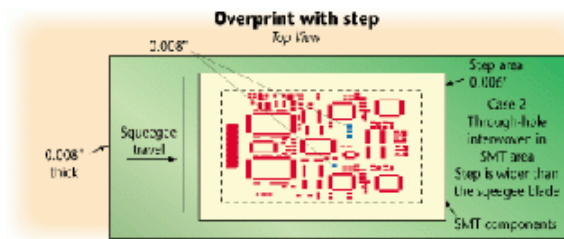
If through-hole components are interwoven with SMDs, the stencil can be stepped down and then back up for the through-hole components.
